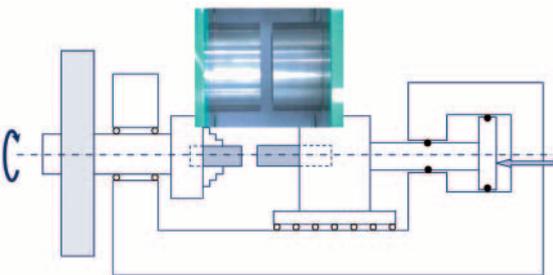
Principle of inertia friction welding. Left: rotating flywheel; centre (gray): components being joined; right: compression drive
